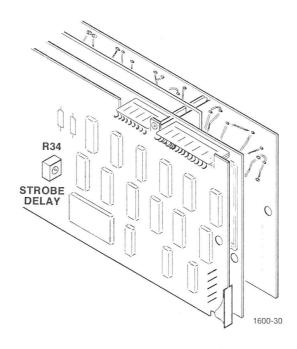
Strobe Delay R34 adjustment on P7001 Core Memory Assembly.
